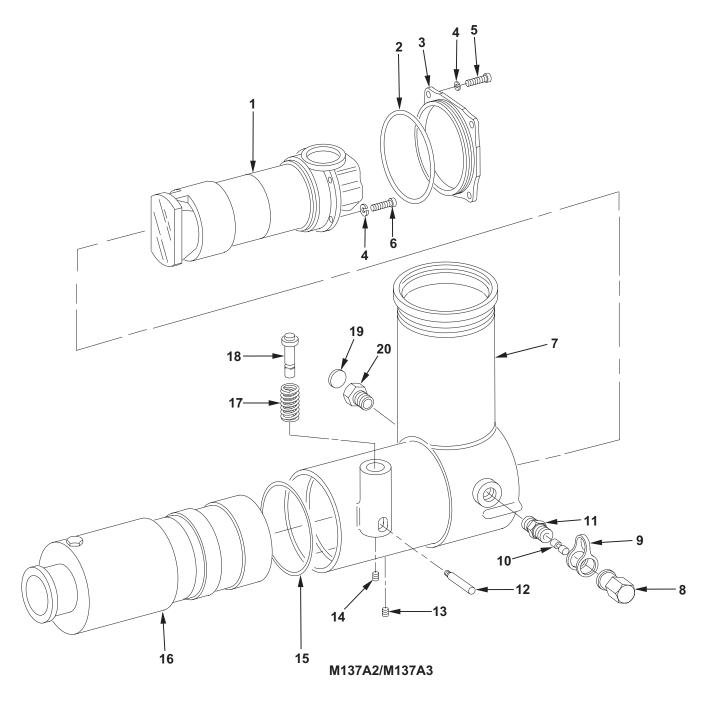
Elbow Assembly, M137, 11741201, and Elbow Assembly, M137A2/M137A3, 12984733 (Sheet 2 of 2).
